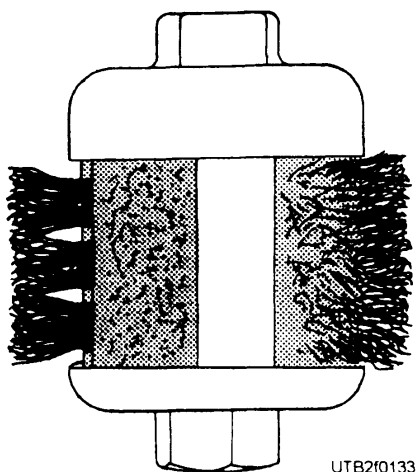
Wire bristle brush for cleaning large tubes.
